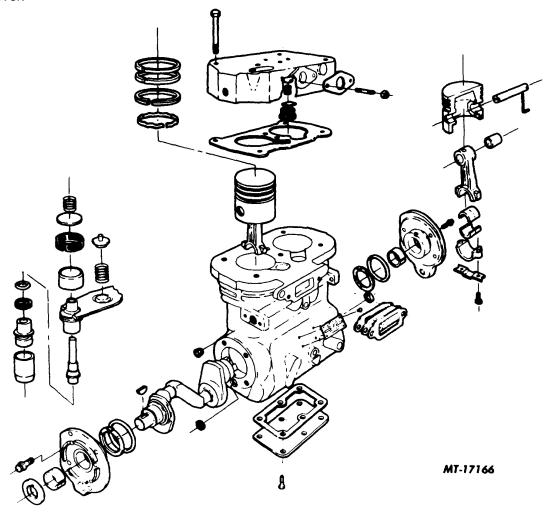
Exploded View of Tu-Flo 501 Air Compressor
